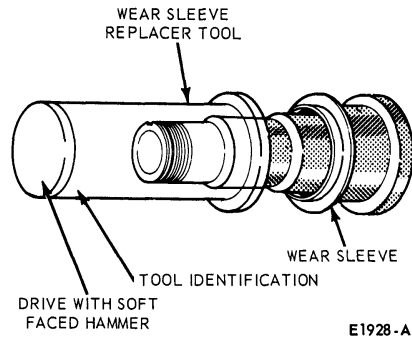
Tool Application of Wear Sleeve (Wiper) Installation
